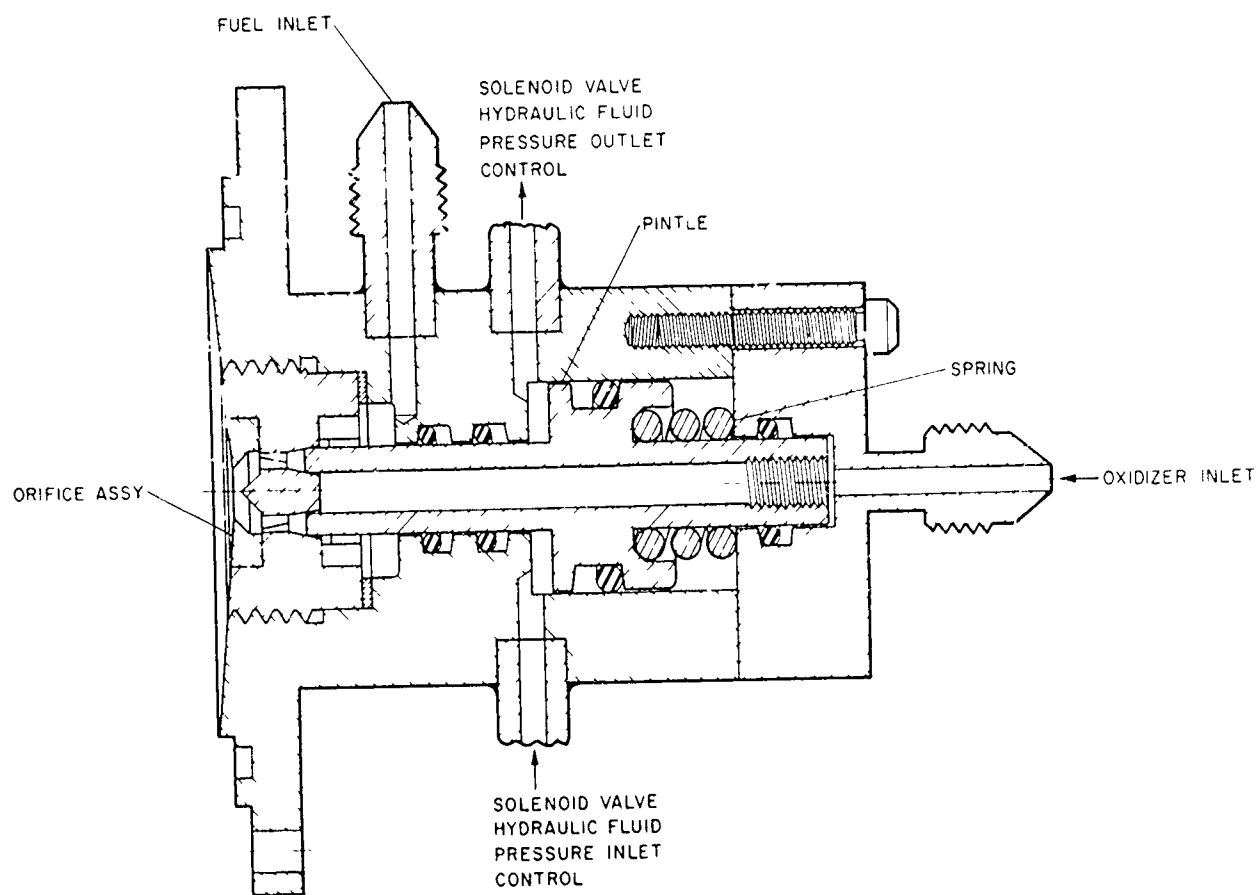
Solenoid-Actuated Variable-Area-Injector Assembly.
